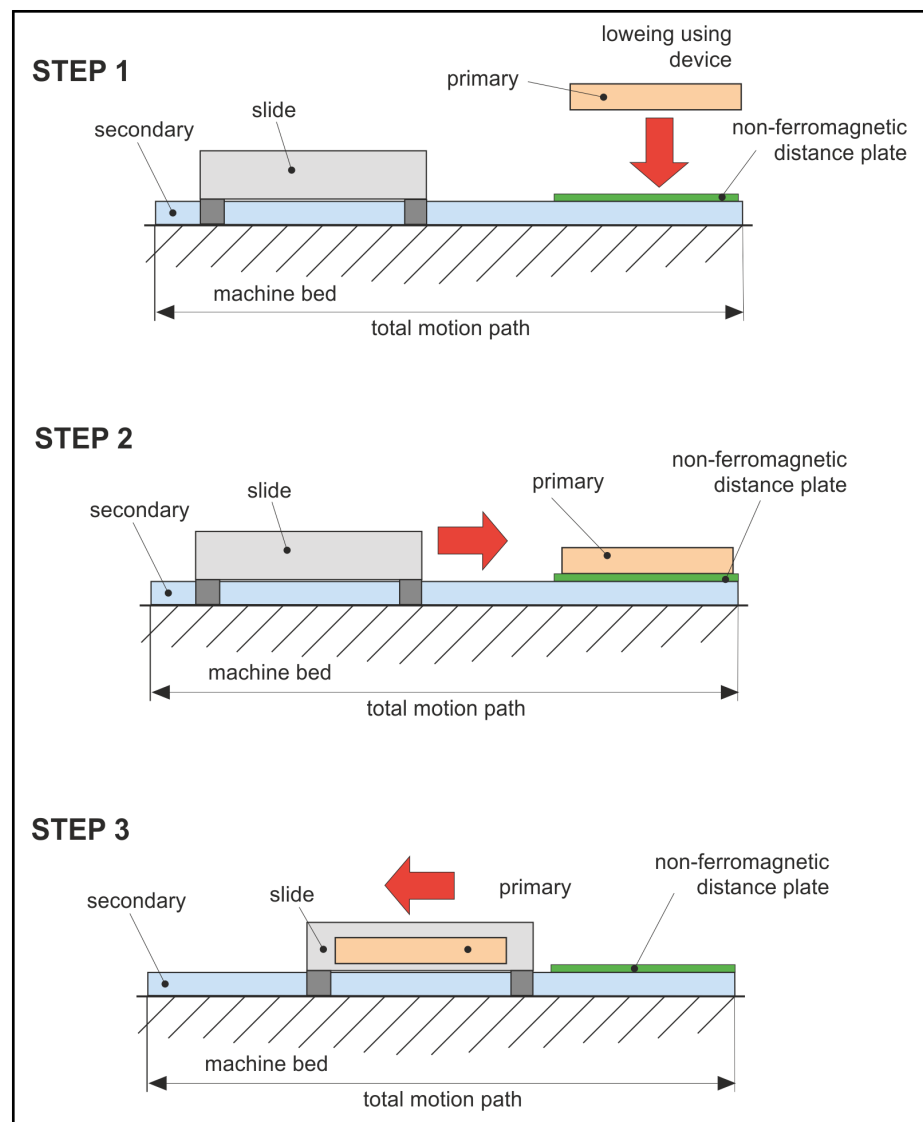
Installation of linear motor components at a complete secondary part via the total path.
